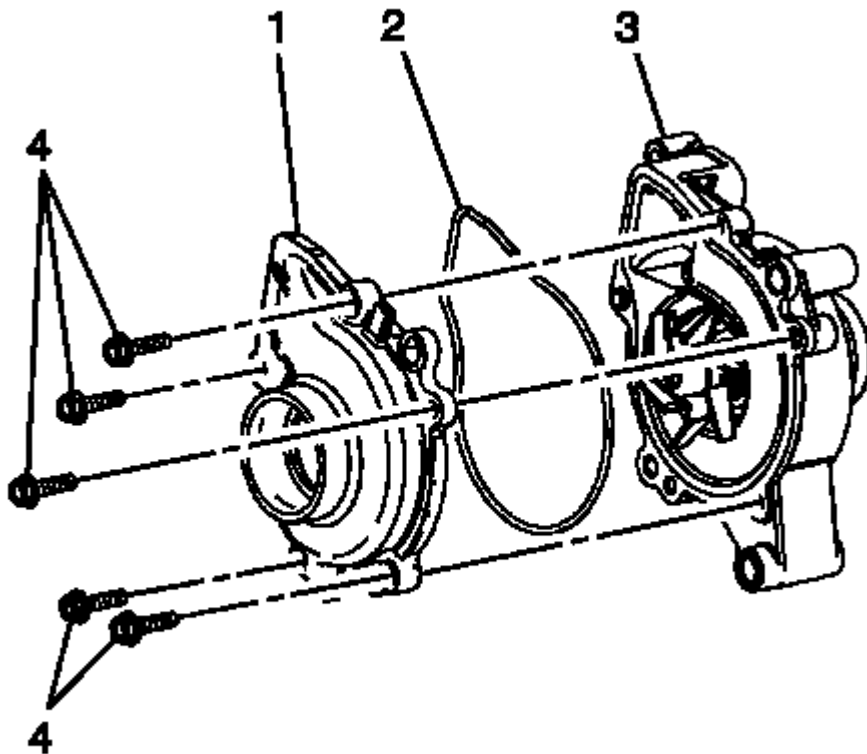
Water Pump, Water Pump Cover, Rear Cover Fasteners And O-Ring Seal
